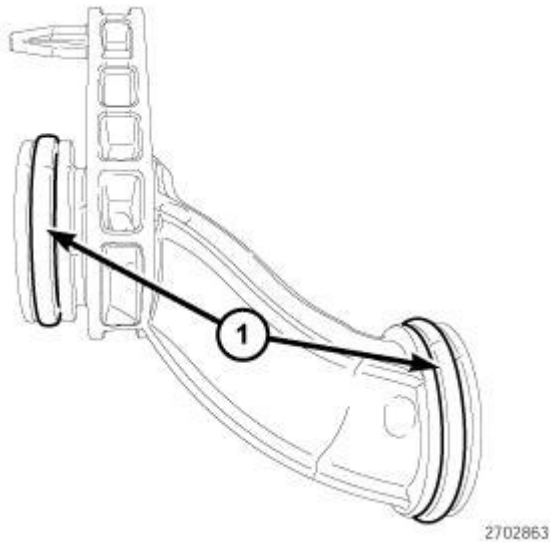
OIL FILTER HOUSING ADAPTER & BOLTS
